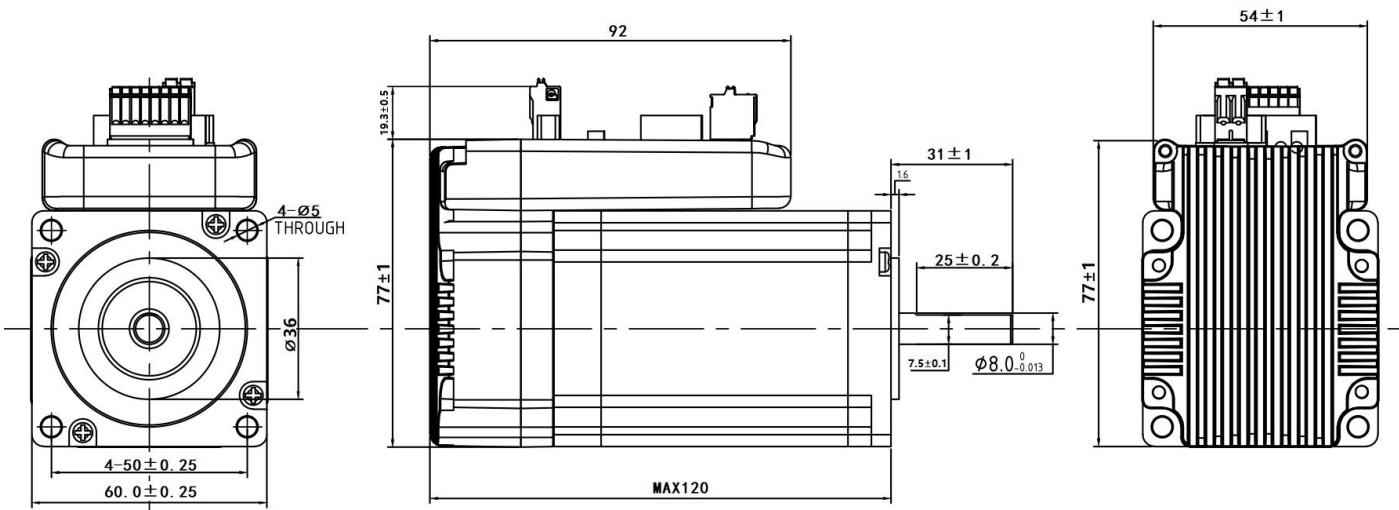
Machine dimension of JMC IHSS60-R/RC Drive (unit: mm)
